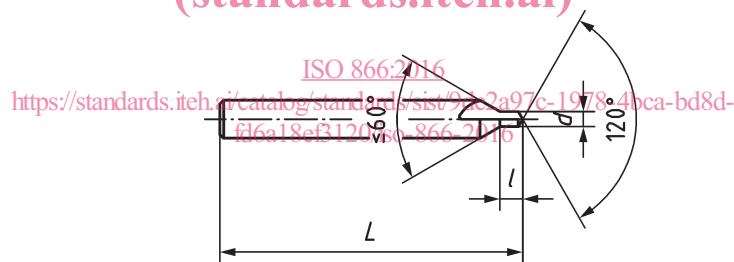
Single-ended centre drill — Type A ($d \leq 0,8$ mm)
